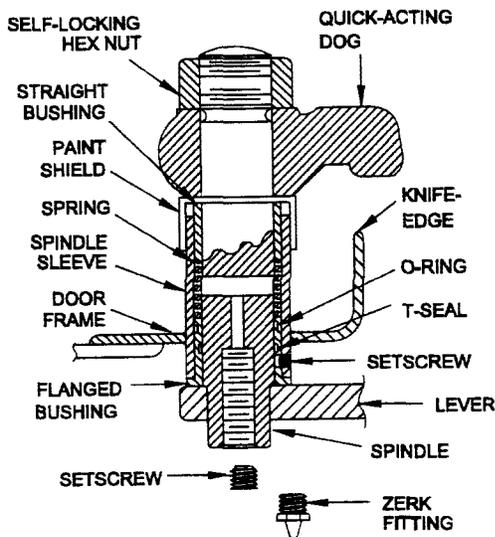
B. Quick-Acting Door Dog Assembly (Cross Section View) Modified by MACHALT 167-31010 (ECP-526)
